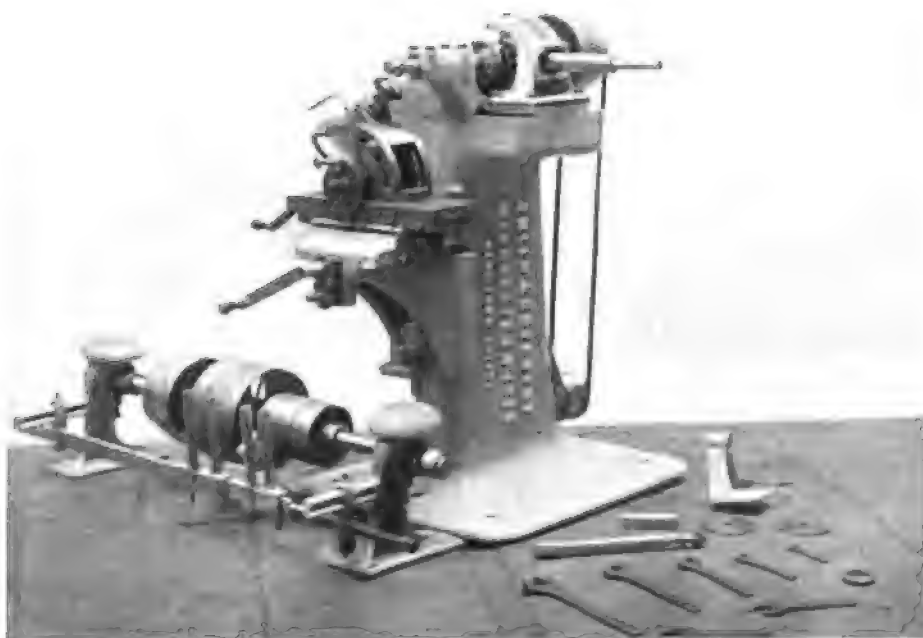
HAMILTON MACHINE. (Smith & Coventry, Ltd.)
